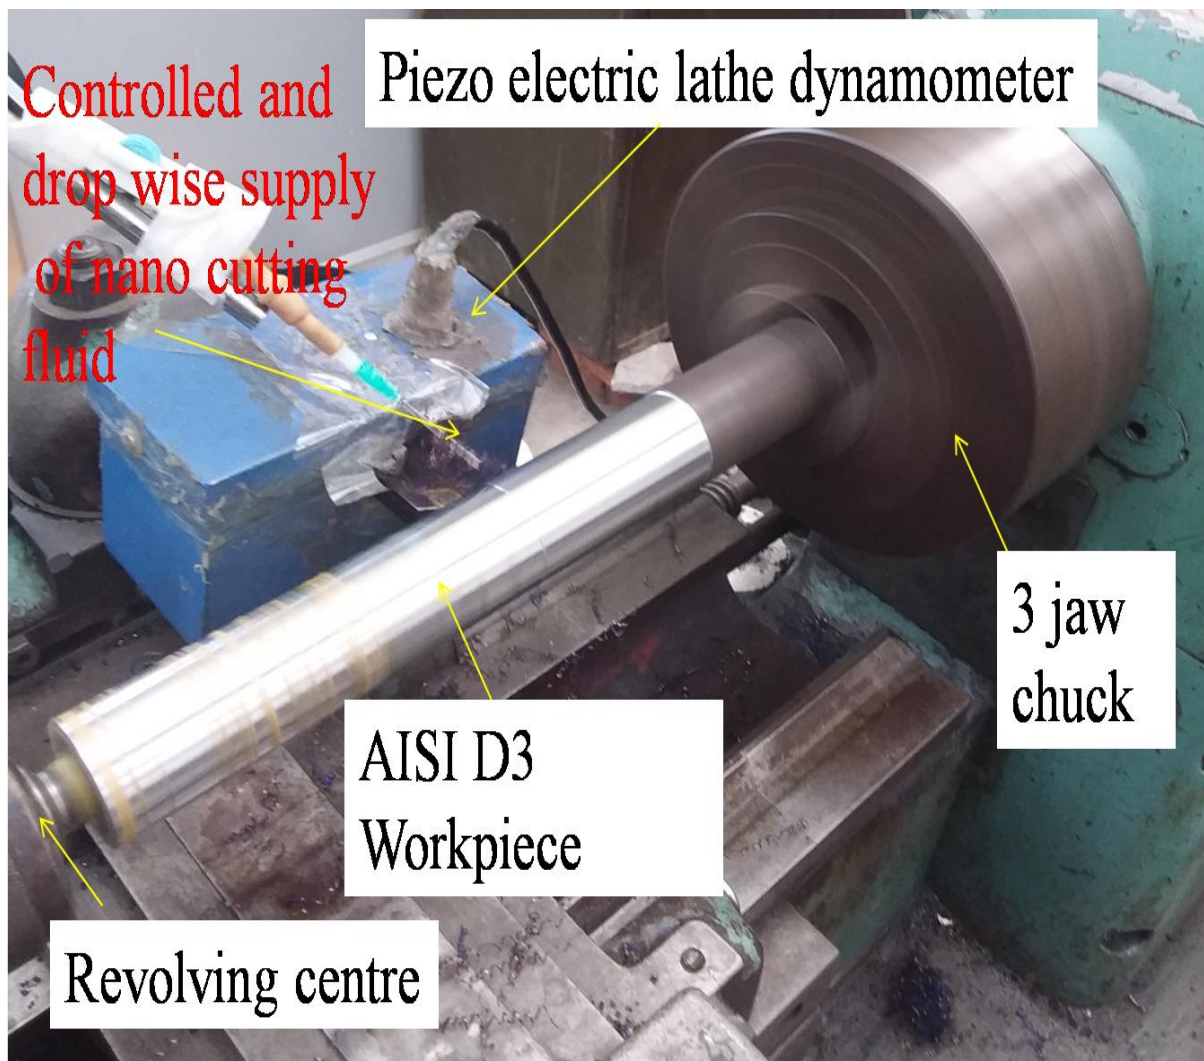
Lathe machine with self made supply of controlled drop wise supply of nano-cutting fluid
